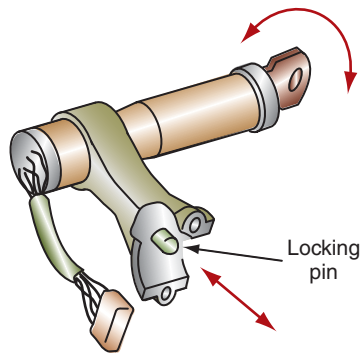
Removing snapping above steering shaft bushing.
